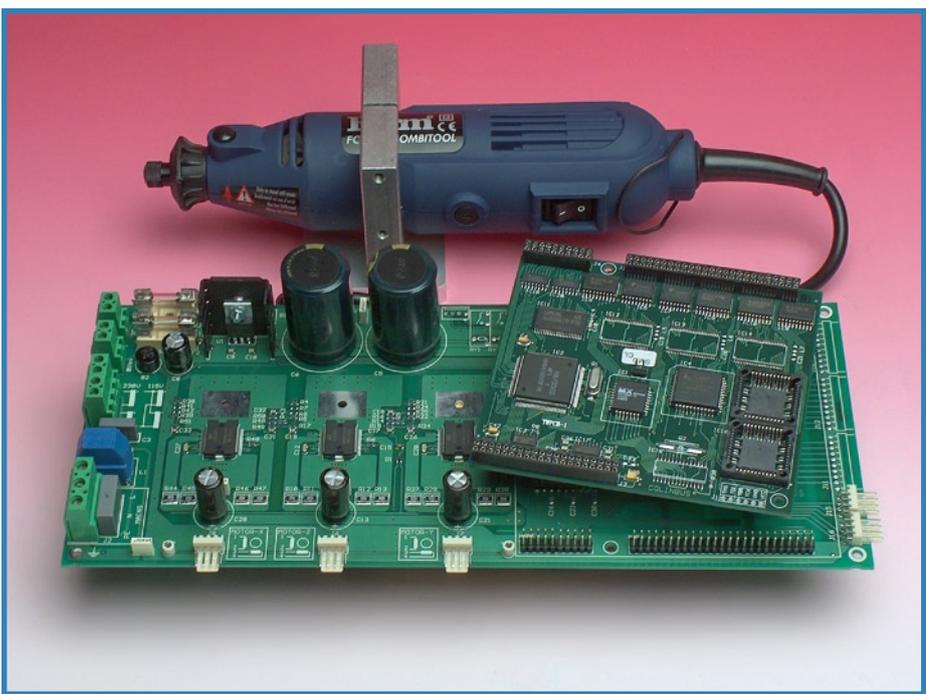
The assembled circuit boards and the spindle motor and bracket.
